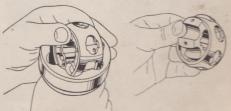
REMOVING CAGE-RZEPPA JOINT
